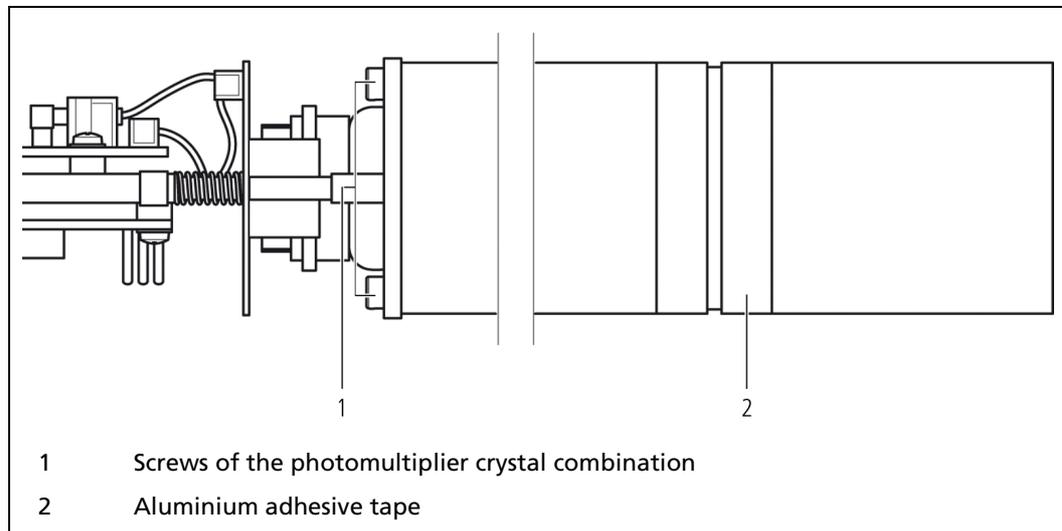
GAMMAcast detector LB 6739 Csl 40/50, magnetic shielding and aluminium adhesive tape
